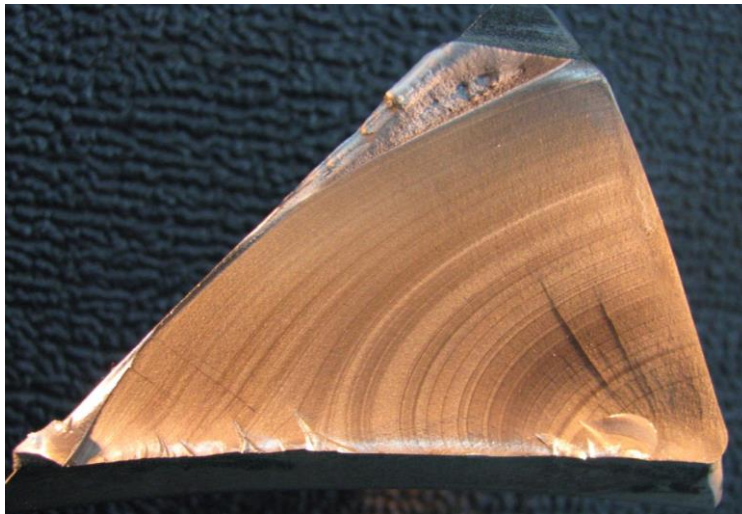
Fracture Surface of Blade Root Section Failed in Fatigue
